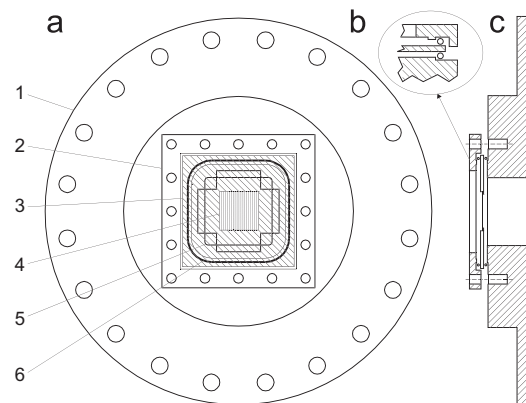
(a) Schematic drawing of the test flange that separated the two vacuum chambers and onto which the ceramic PCB was mounted: 1—CF150 flange, 2—top frame, 3—PCB, 4—DSSD, 5—opening in CF150 flange, 6—aluminum ring; (b) detail of the grooves holding the wires; and (c) cross-section of the test flange. The α -source holder and the mounting holes for the connectors are not shown for the sake of clarity.
